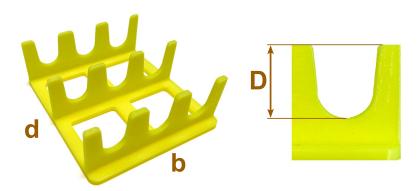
The figure shows the 3D printed plate with different hole configurations. It was used to test hole fitting for concept c1. The plate dimension is $70 \text{ mm} \times 80 \text{ mm}$ ($b \ x \ d$). D is the hole depth.
